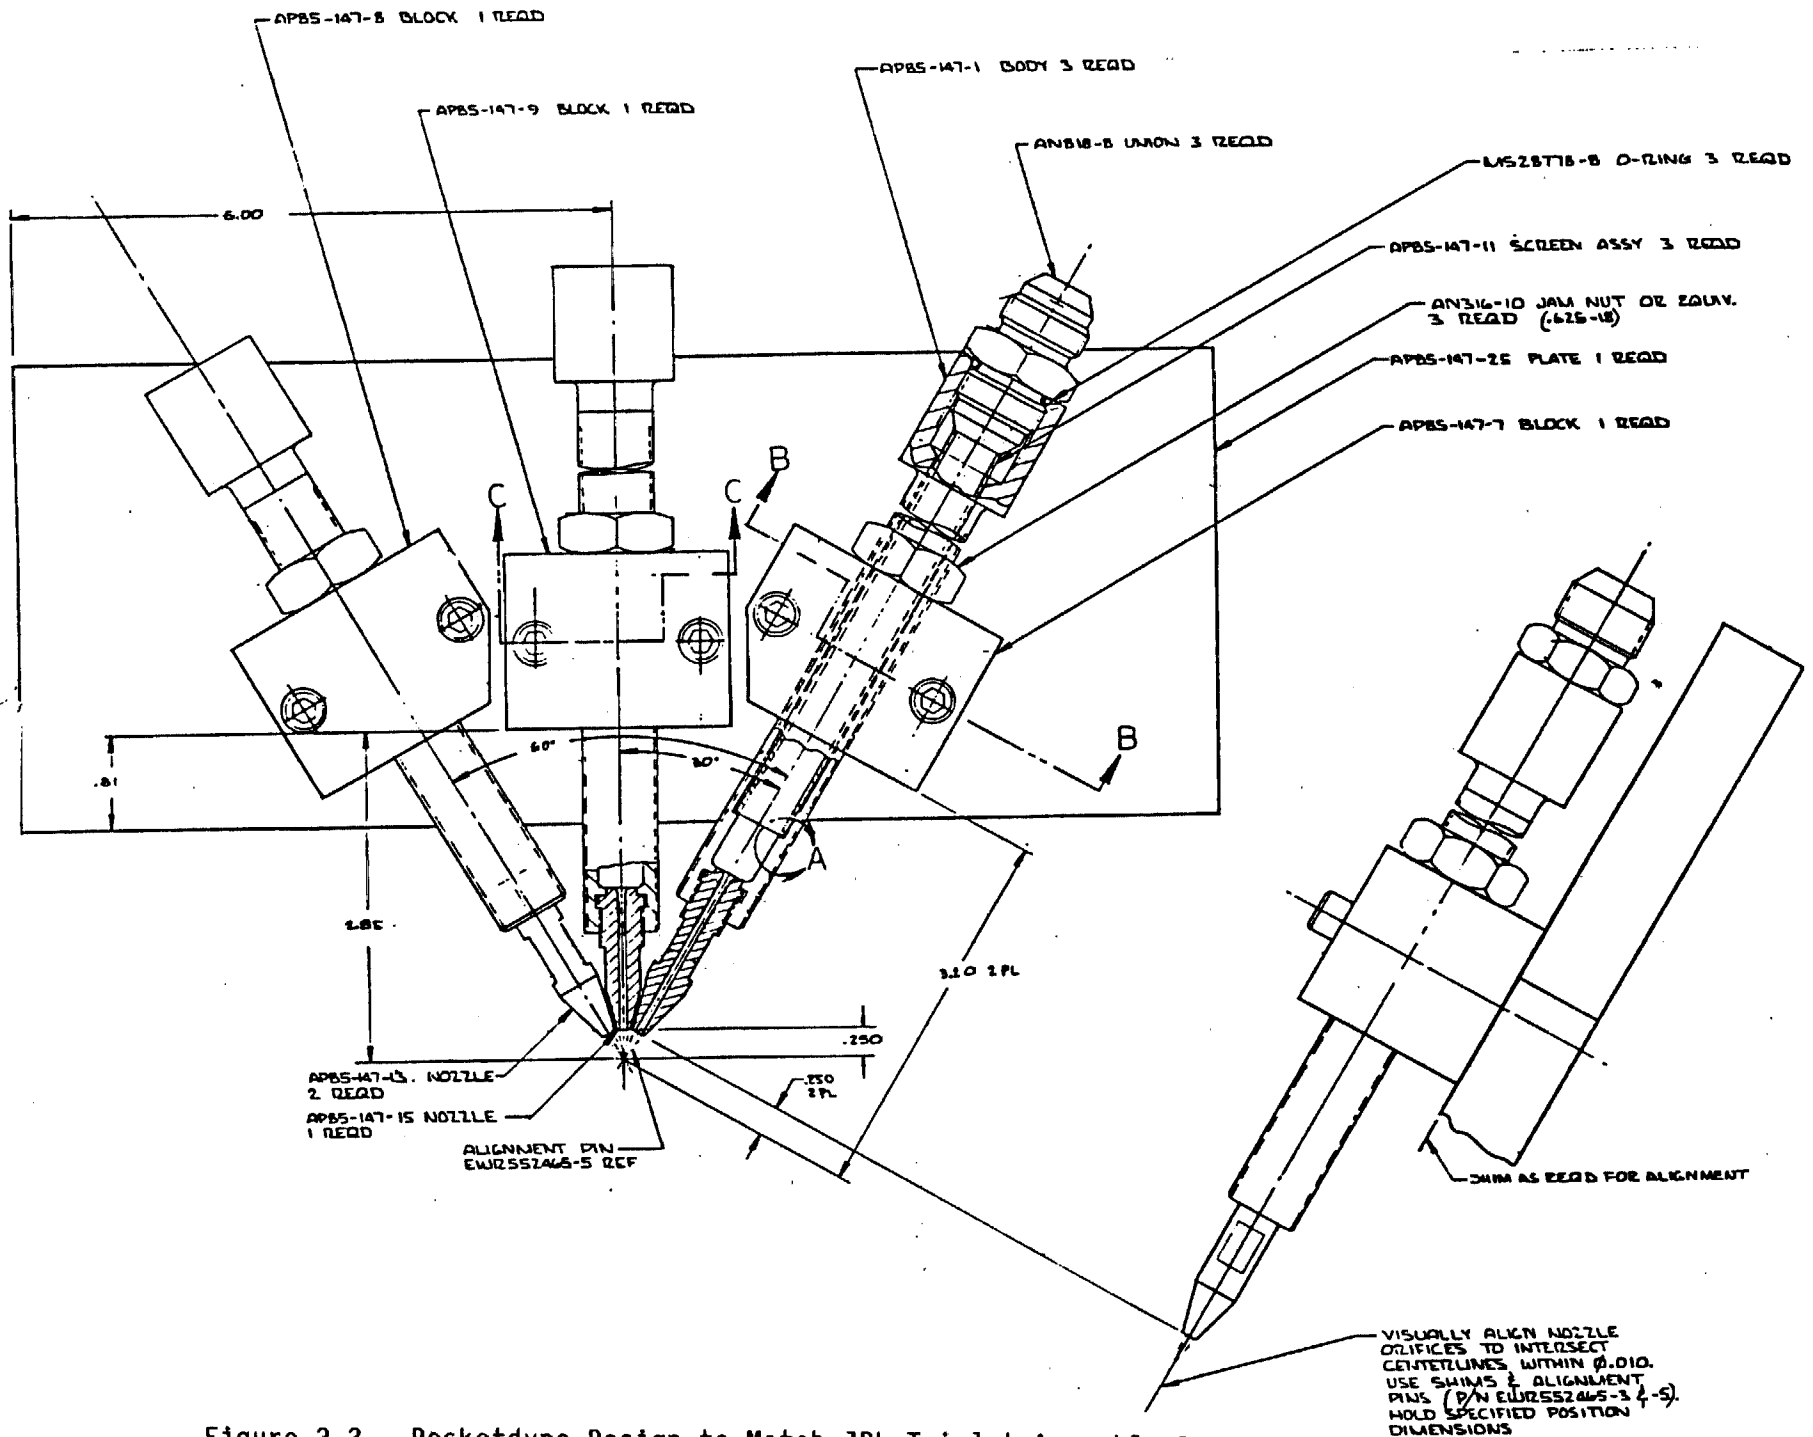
Rocketdyne Design to Match JPL Triplet-Assembly Drawing
